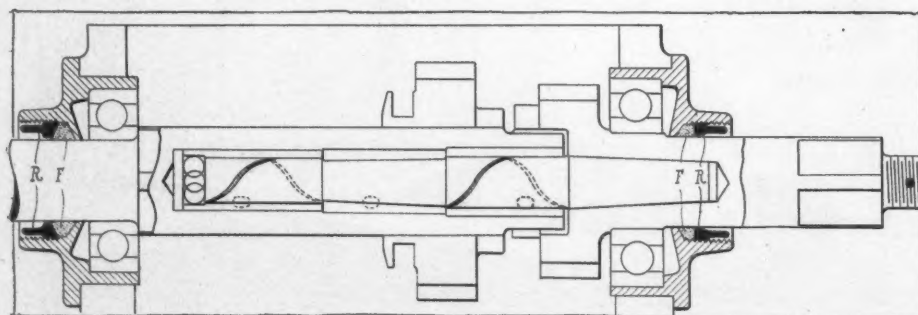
CHALMERS PACKING TO PREVENT LEAK IN GEARBOX
